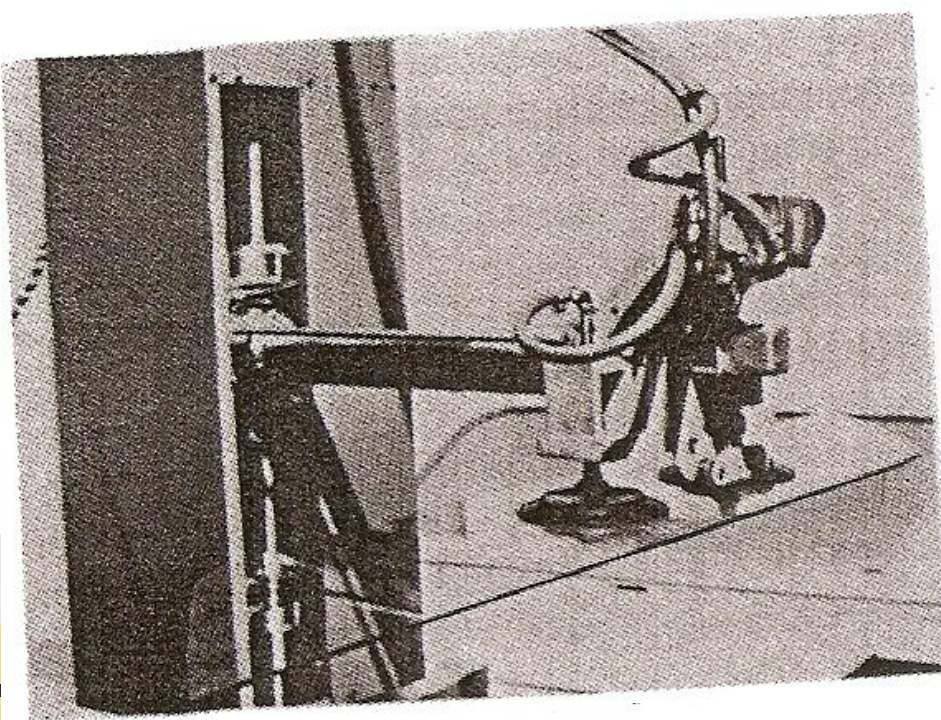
Vacuum cup gripper lifting glass plates (Photo courtesy of Prab Conveyors, Inc.)
